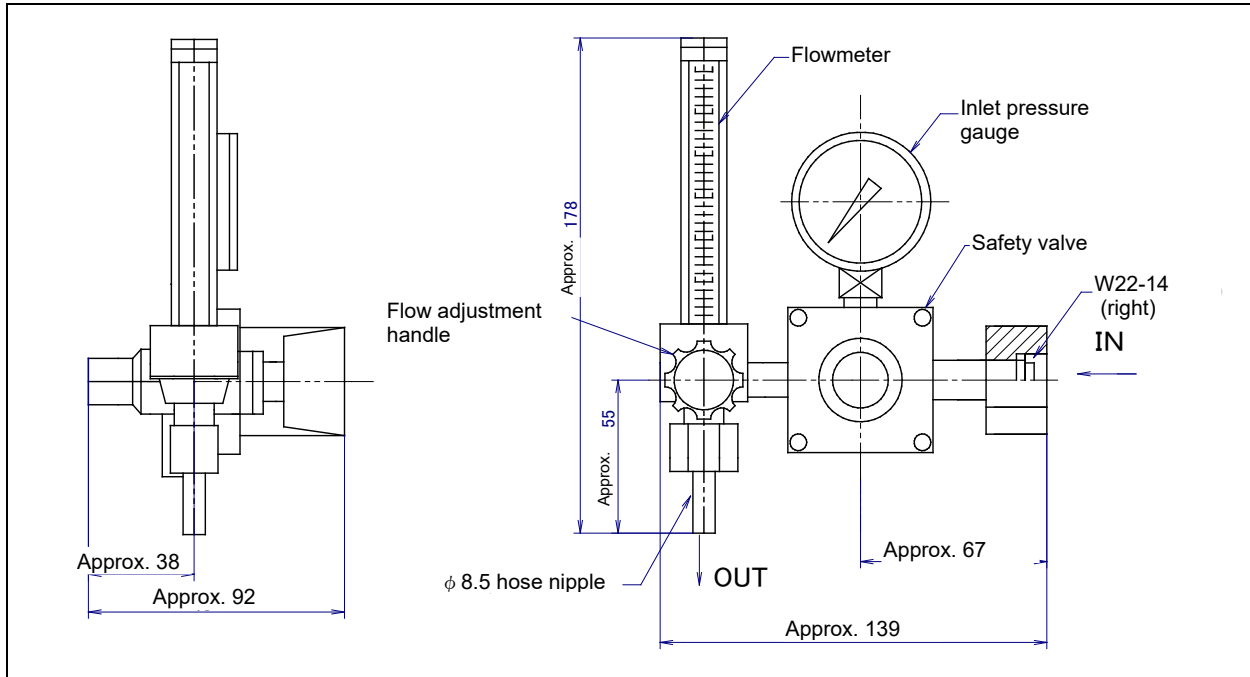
(c) Regulator external dimensions (A05B-1220-J383)
